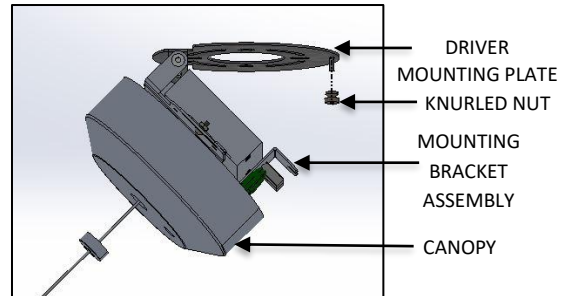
MOUNTING PLATE DIS-ASSEMBLY
